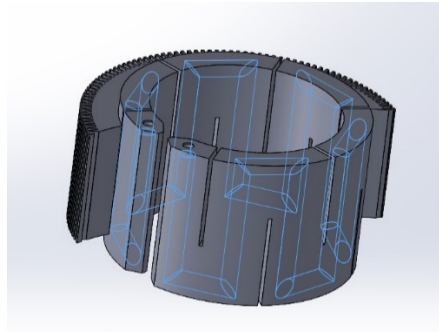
Motor Cooling Jacket Cross Section and the One Single Pipe Line.
